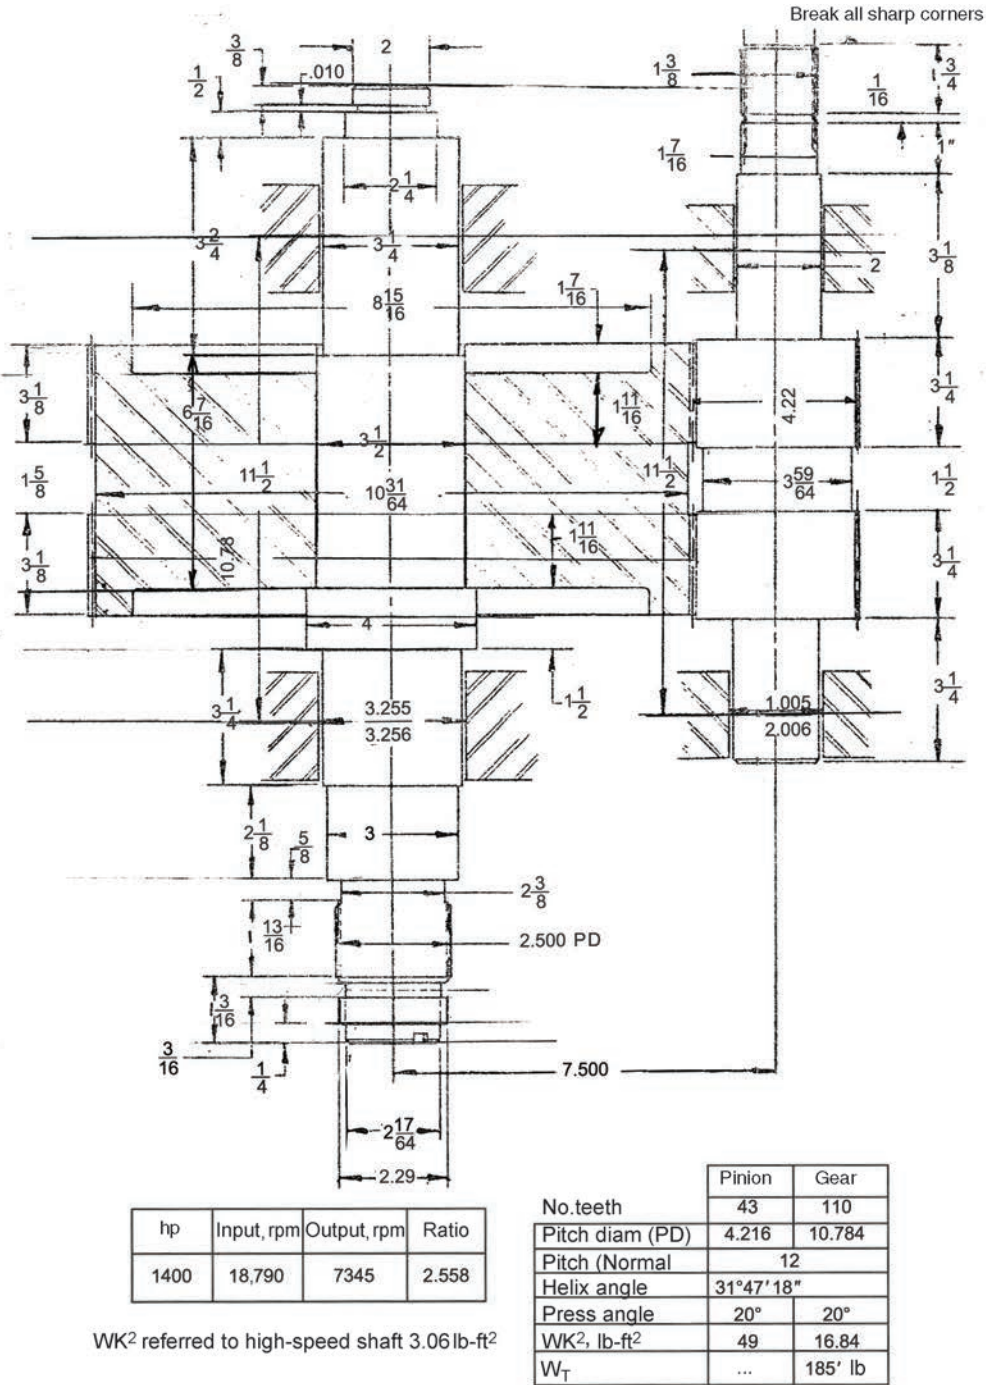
Gearbox shaft dimensions and mass elastic data
